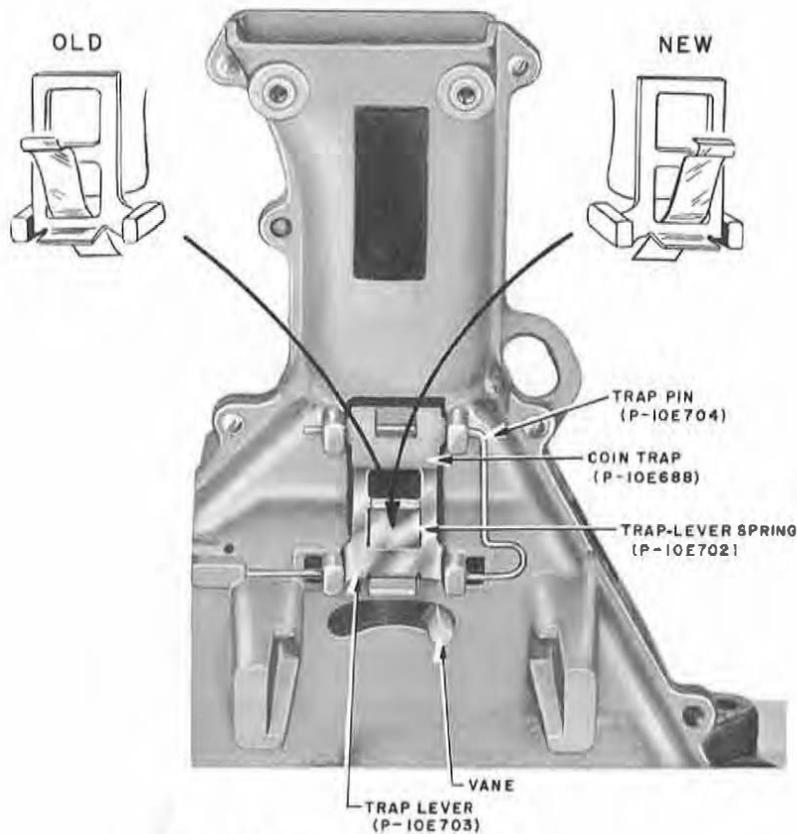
Trap-Lever Spring and Trap Lever Assembled
